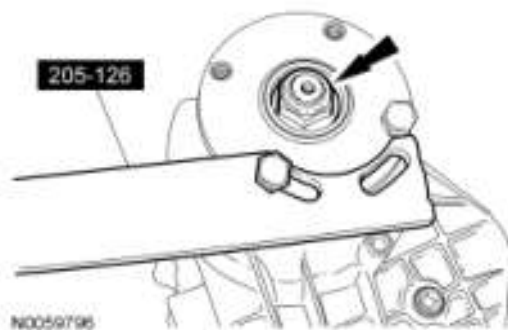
Removing Output Flange Nut Using Special Tool (205-126) To Hold Output Flange
